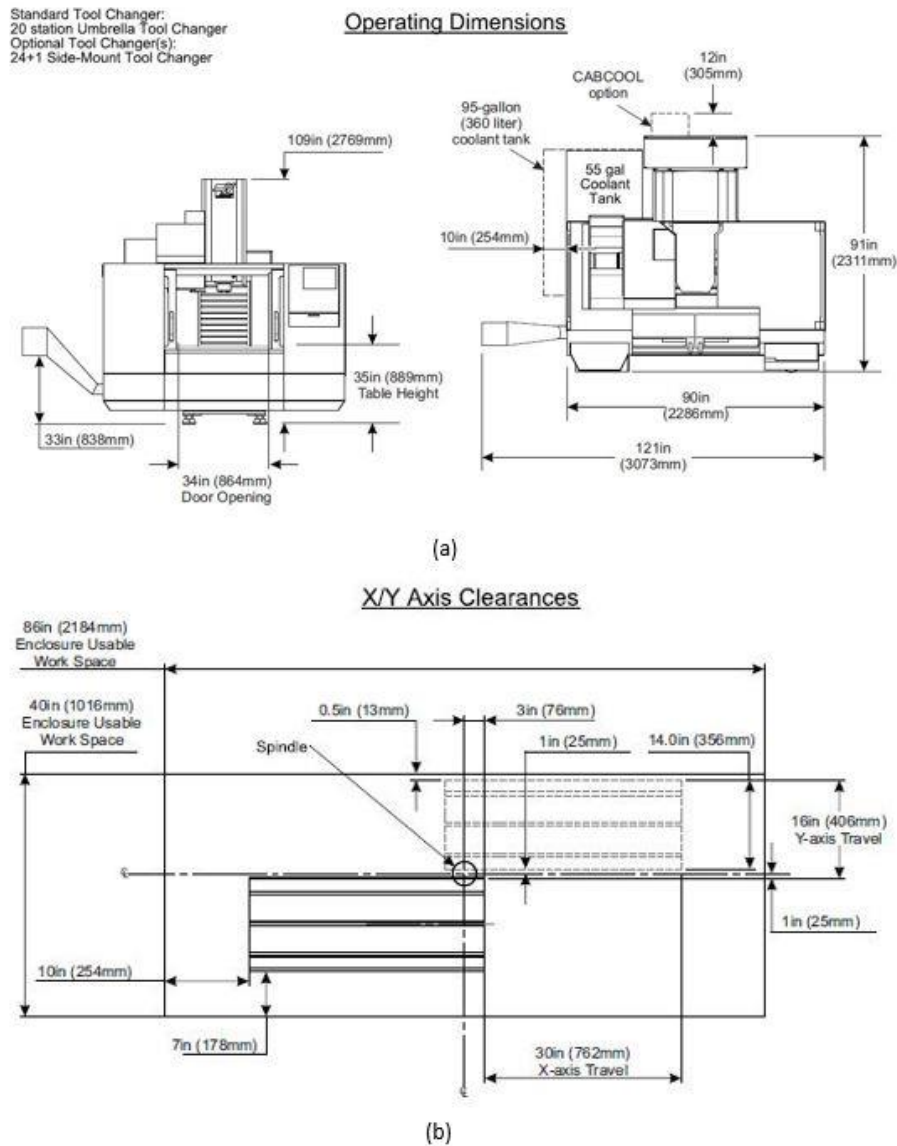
(a) HAAS VF-2SS machine operation dimension (b) X/Y Axis clearance [66].
